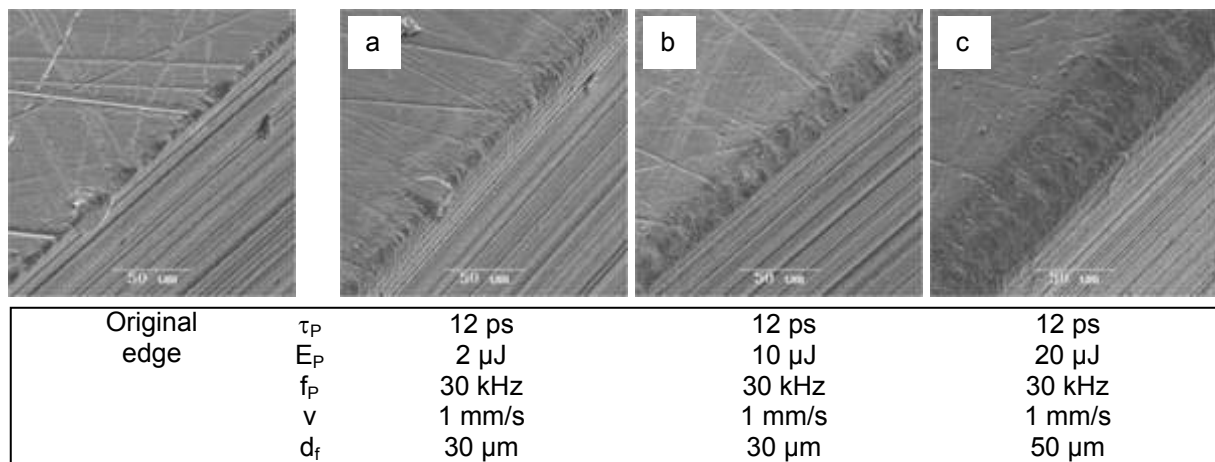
Edge rounding using different process parameters (courtesy of LZH)
